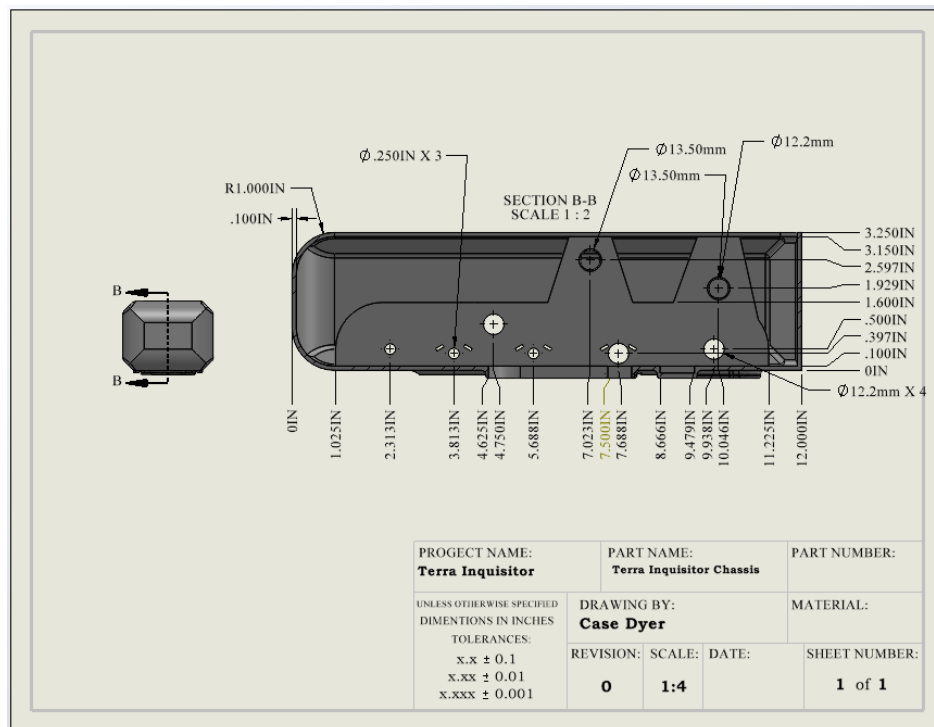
Terra Inquisitor Side Cross-Sectional View
